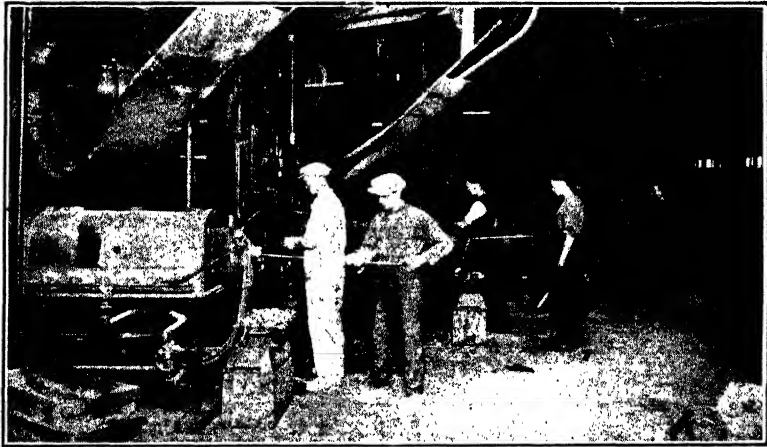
A group of forging presses producing 300 to 1100 pieces per hour each.
